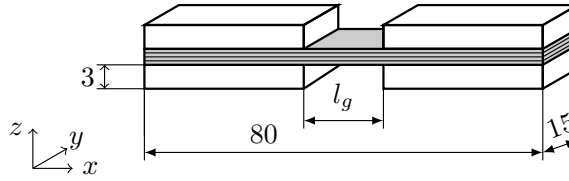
Dimensions of uniaxial compressive test coupons (in mm).
